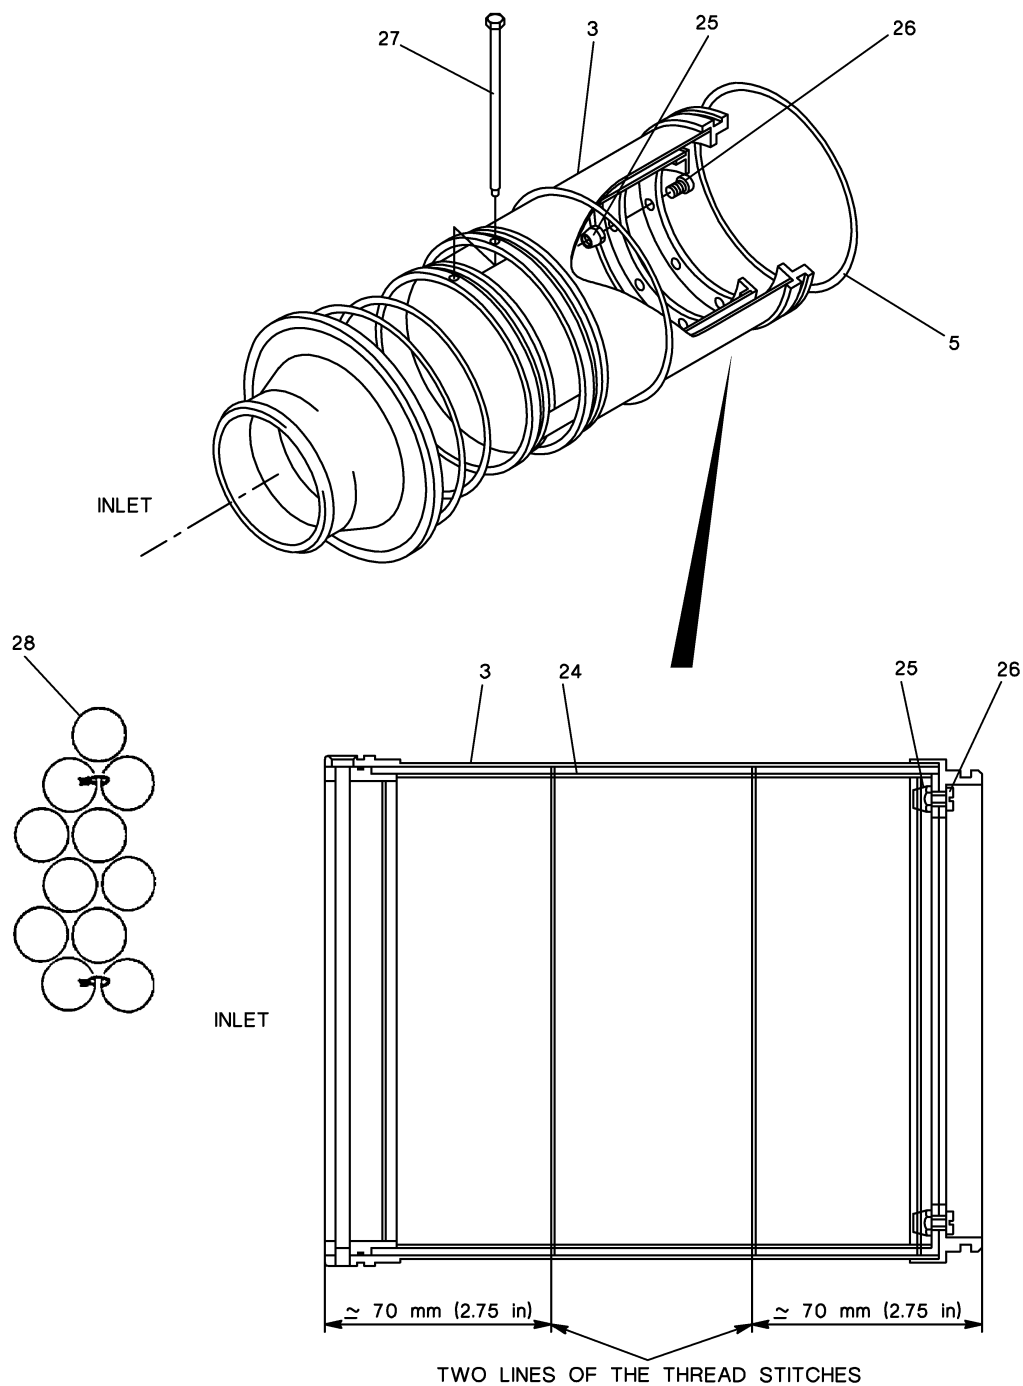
REMOVAL/INSTALLATION OF COALESCER SLEEVE
